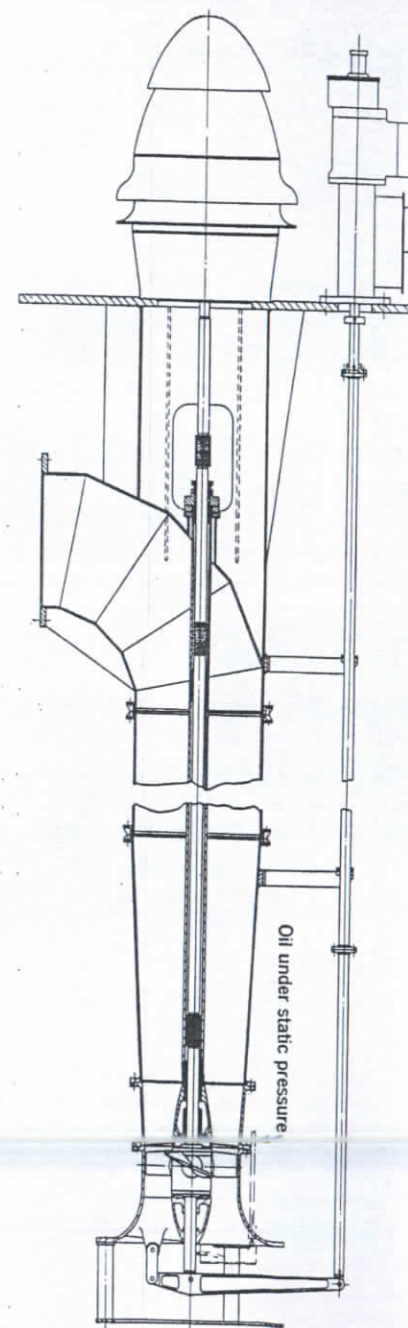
24-in. Ingersoll-Rand adjustable impeller vane axial flow pump at Central Illinois Electric and Gas Company; 22,000 gpm, 24.8-ft head, 880 rpm.
